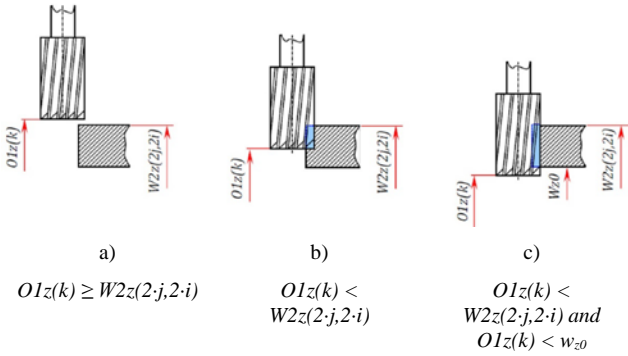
Checking for contact in intersection point of tool circumference and workpiece for different tool positions relative to workpiece in  $z$  direction
